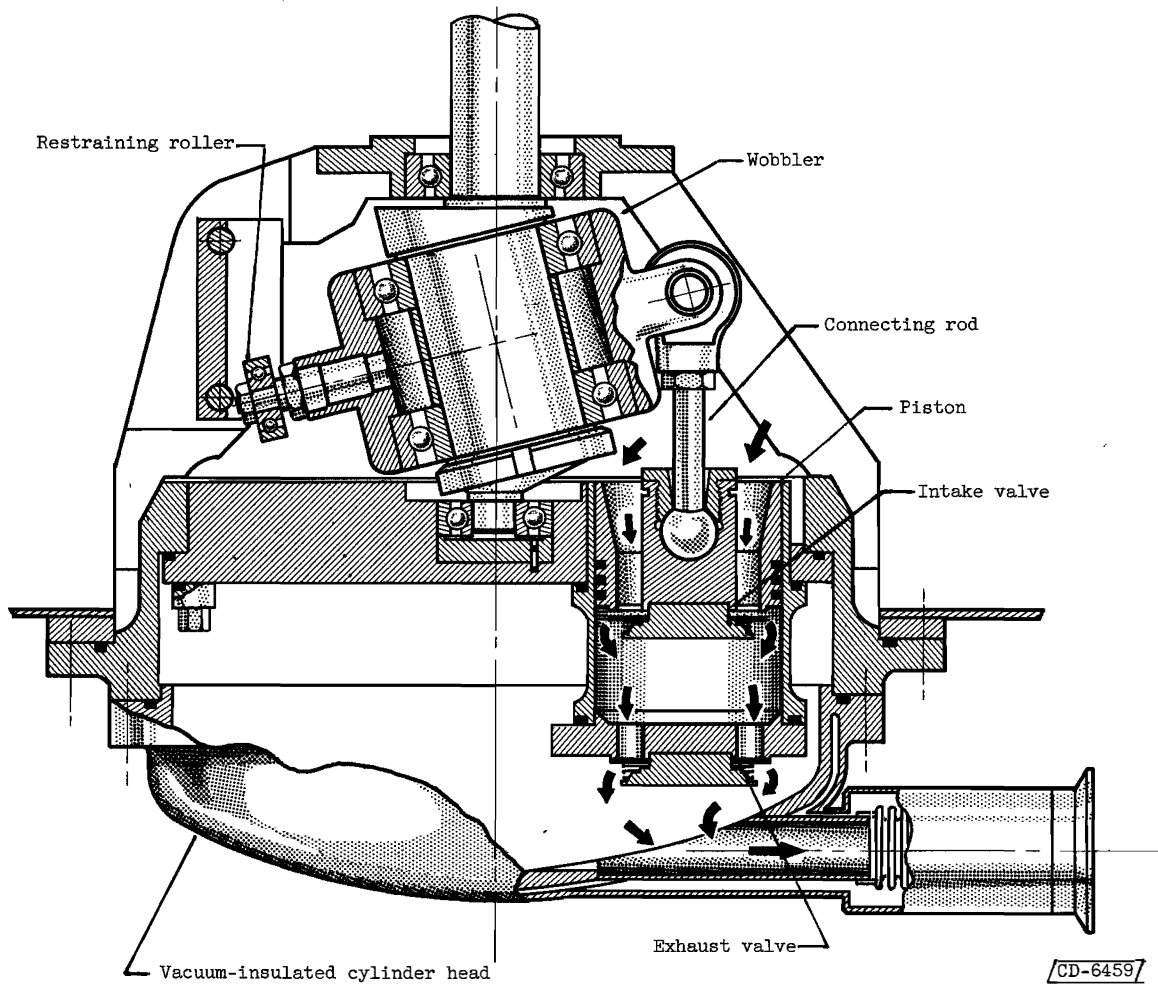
Section through five-cylinder pump as constructed for flange mounting in bottom of tank.
